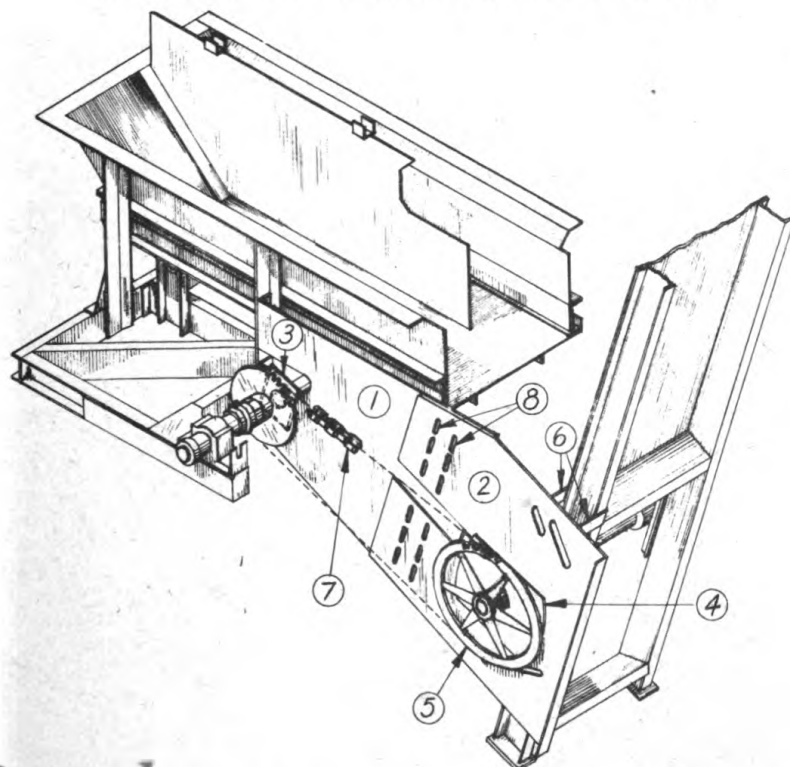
INSTALLATION OF FEEDER DRIVE GUARD PLATE.
